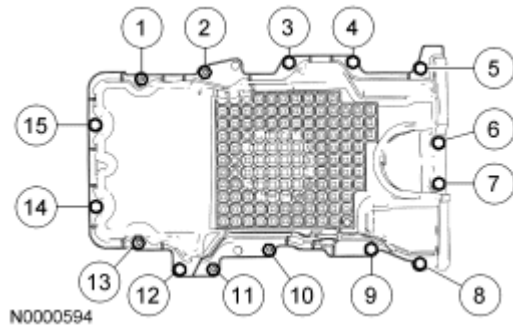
Identifying Tightening Sequence Of Oil Pan-To-Engine Bolts And Stud Bolts
